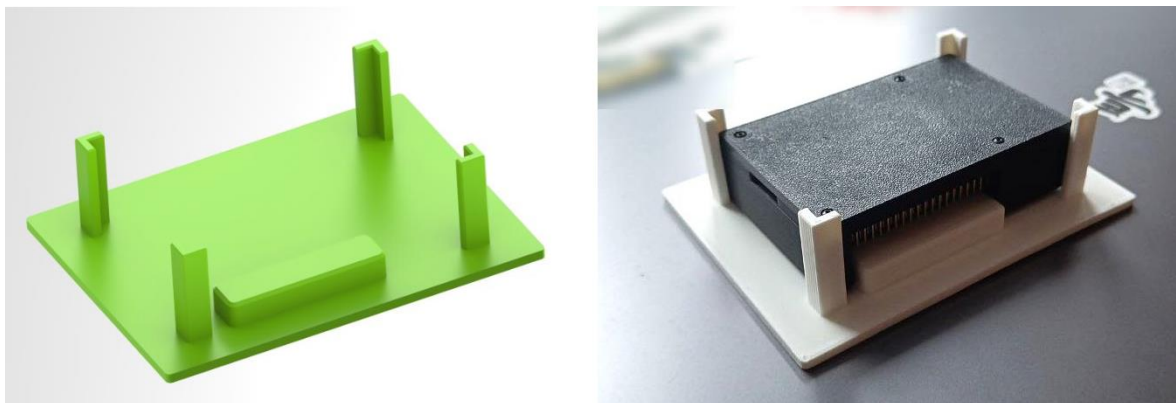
Isometric view on assembly fixture, and assembled product in the fixture [Author]
